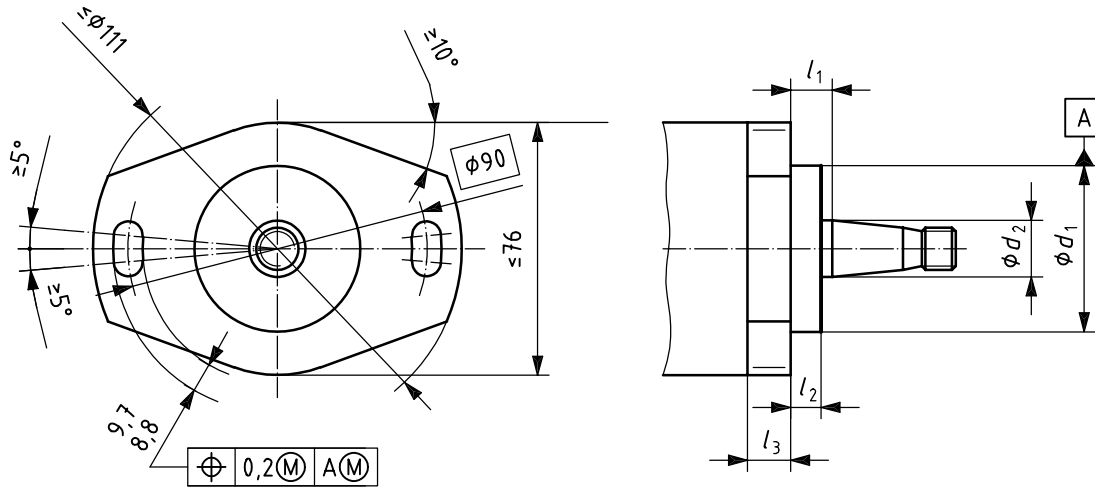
Fuel injection pumps — Type 1 end-mounting flange
